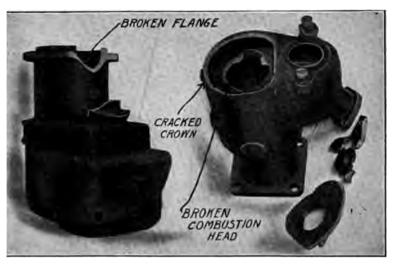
Illustrating Principal Cylinder Defects that May be Read Repaired by Autogenous Welding Process.
